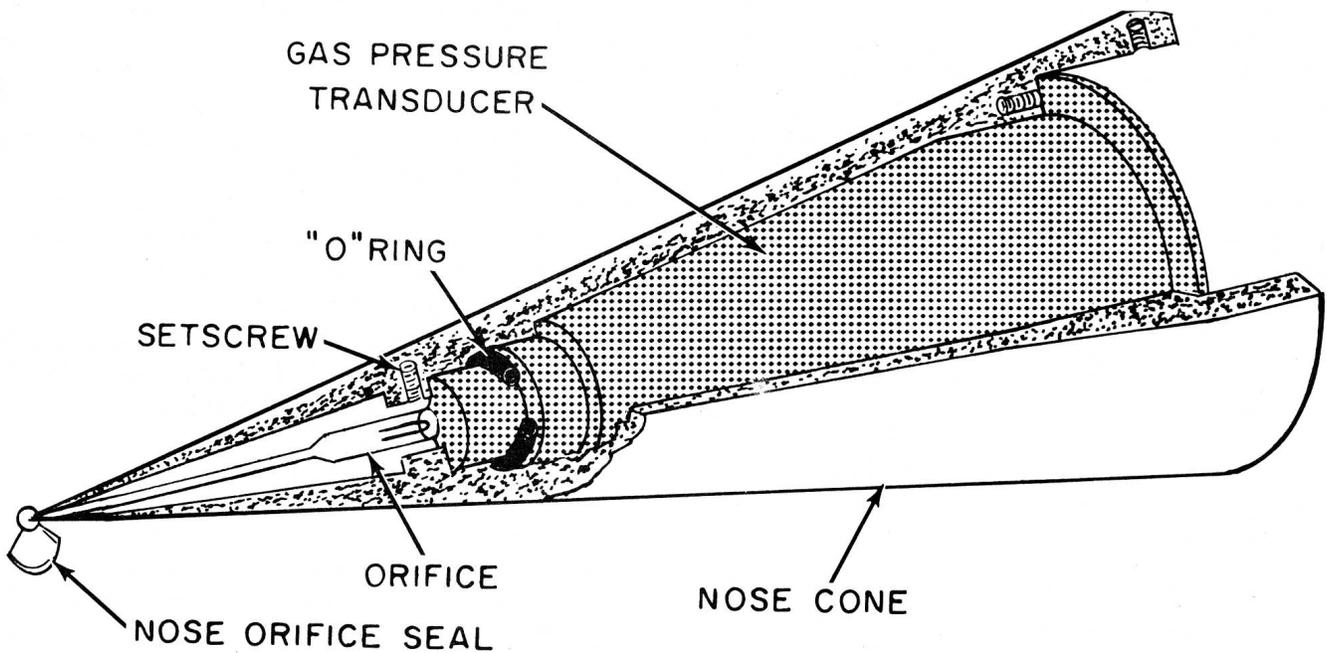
Nose section of Terrier BT-3 missile; cutaway view.
